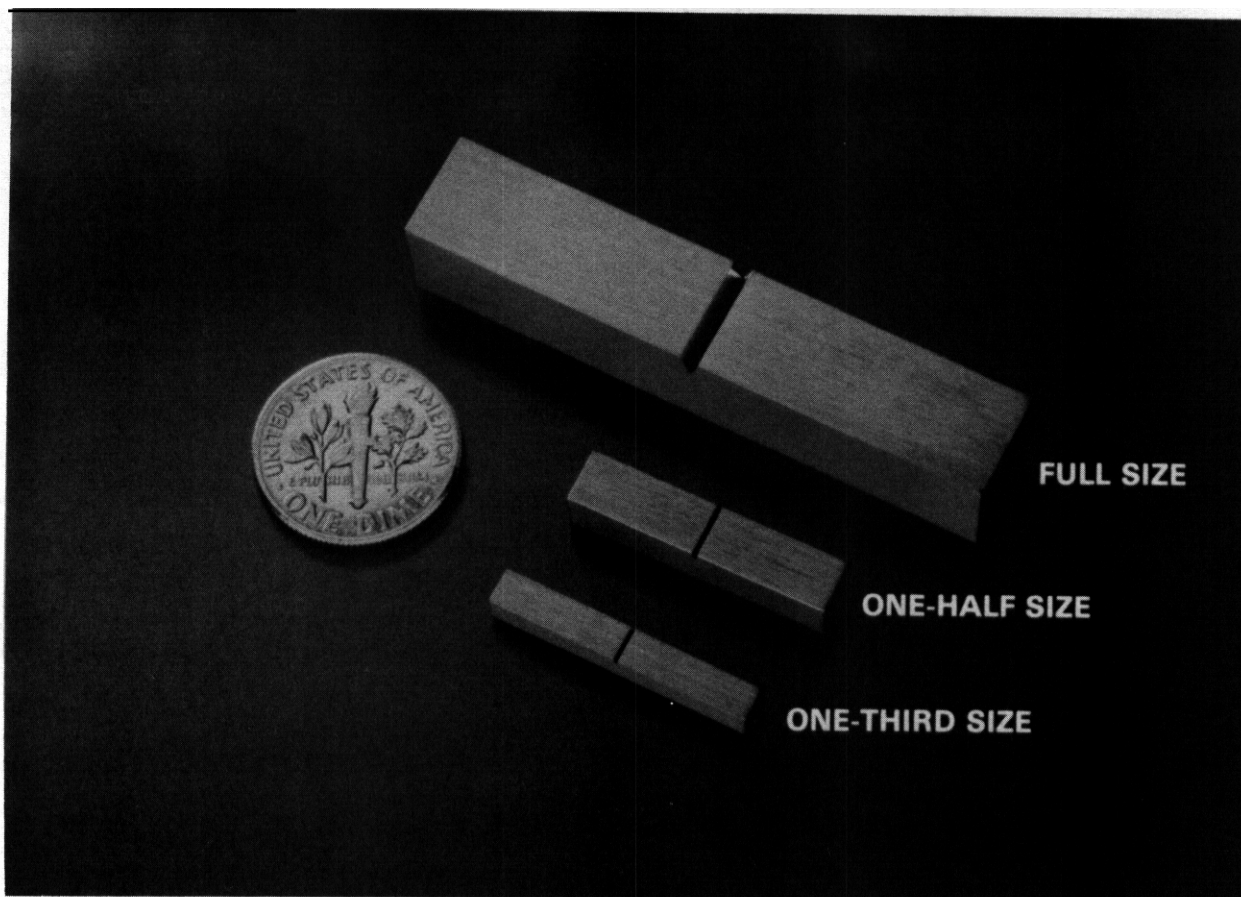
Examples of small specimen geometries for Charpy impact testing and fracture toughness measurement.
